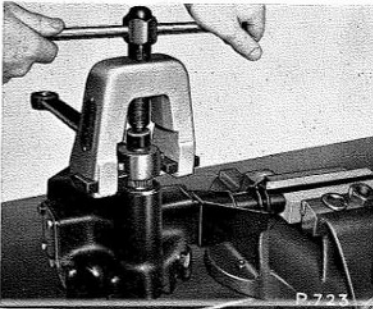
Withdrawing the drop arm using Churchill Tool R.G.59A and the Thrust Pad R.G.59A-2
